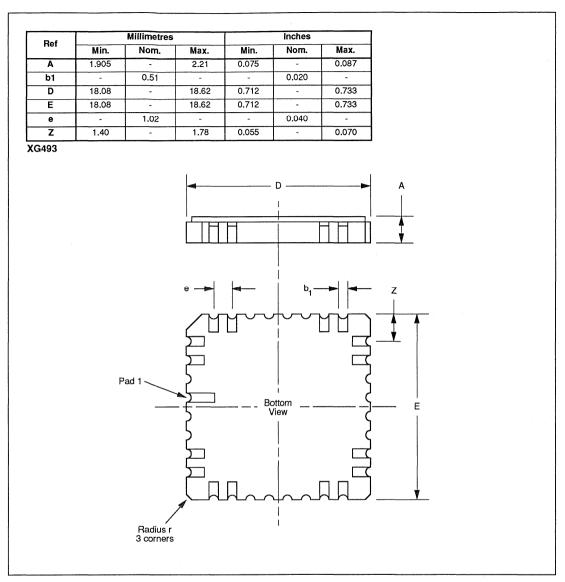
64-Pad Leadless Chip Carrier - Package Style L
